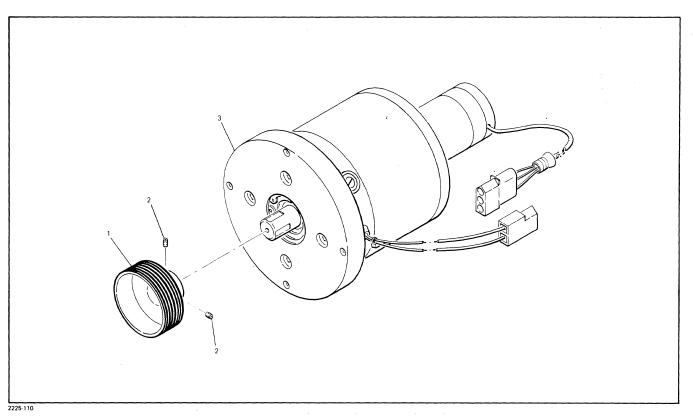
Capstan Motor Assembly MG1, 10 - 37.5 ips
